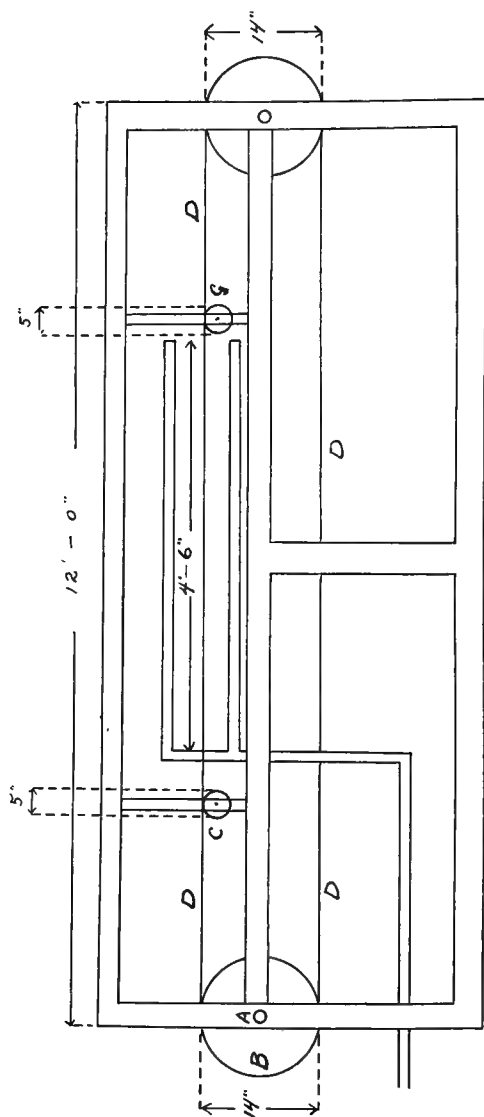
VEGETABLE WASHING MACHINE (NOT FOR LARGE ROOTS)
